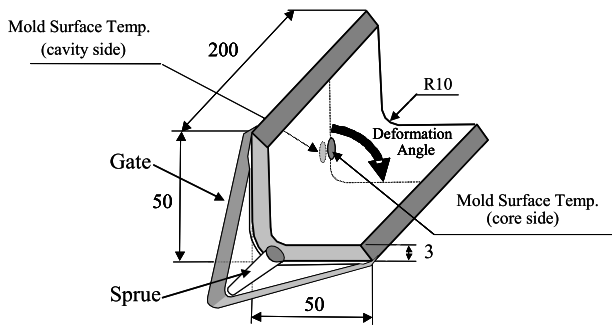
Schematic illustration of L-shaped specimen for angular deformation experiment. Specimen shape and measurement line
